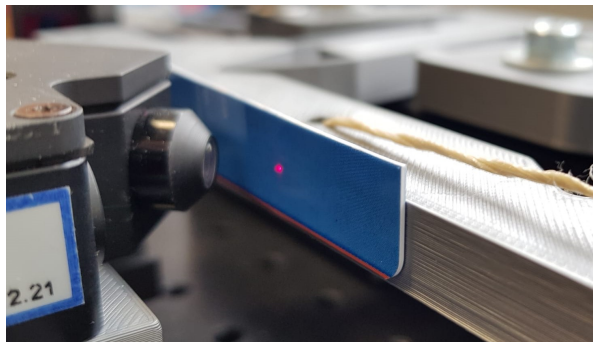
The assumed flat part glued onto the 3D printed part.
